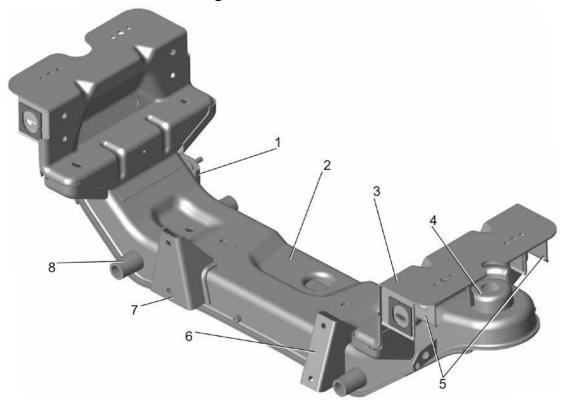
Subframe: 1 -antisway bar mounting brackets; 2 -cross-member; 3 -cross-member mounting brackets; 4 -shock absorber cups; 5 -upper arm mounting brackets; 6, 7 -right and left steering gear mounting brackets; 8 -lower arm axis bushings.
